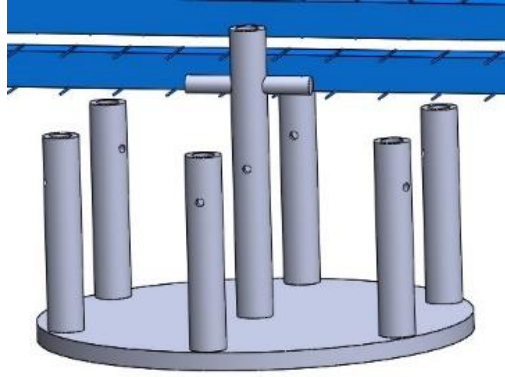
Center bar design of the sprue bar rack, shown hanging on a shelf.
